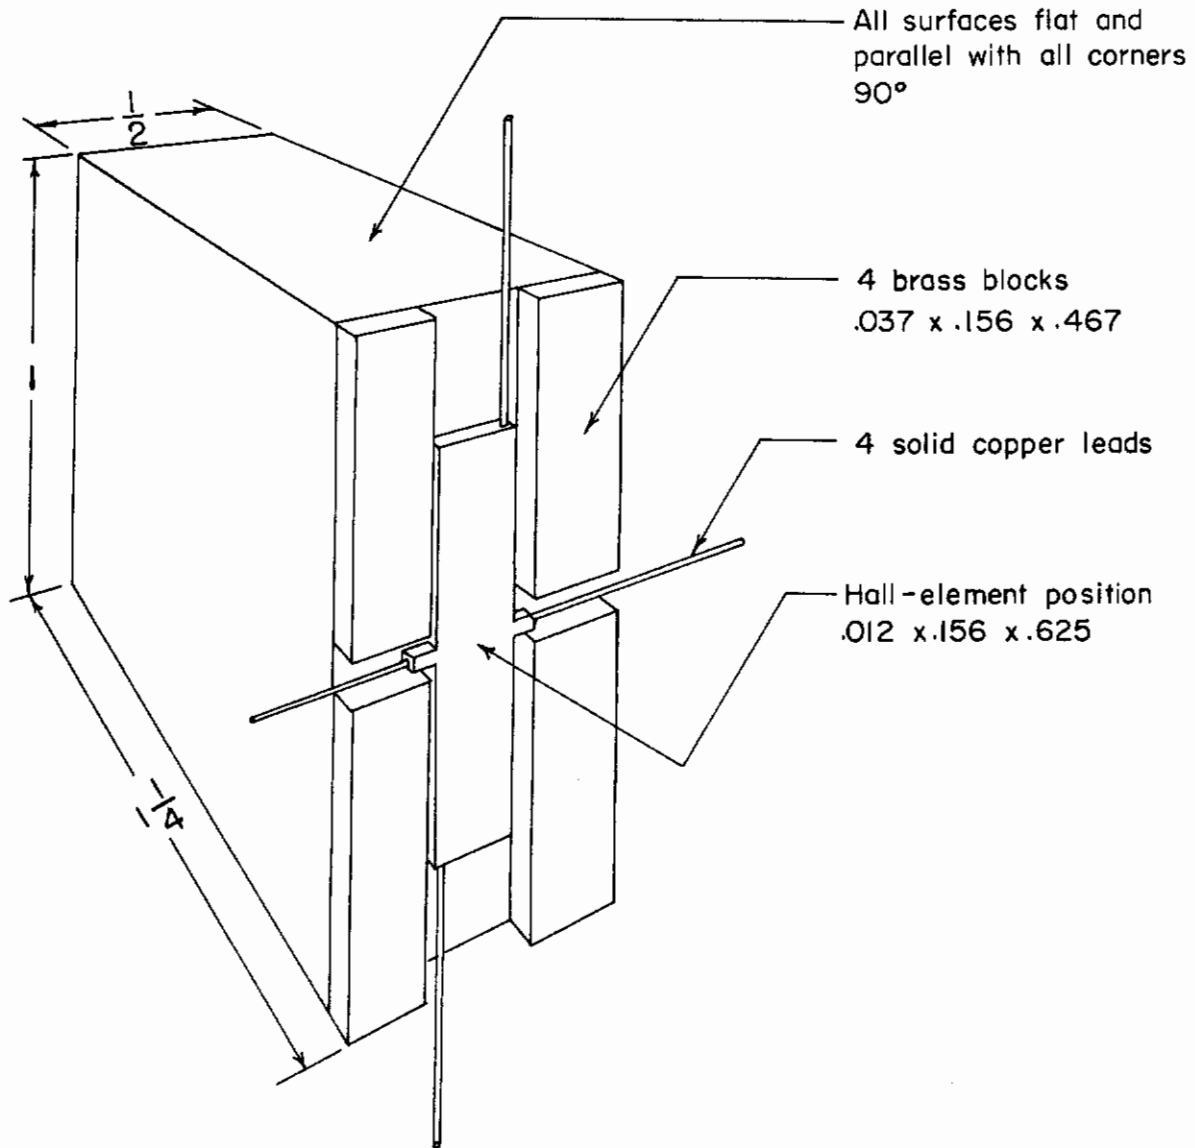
PERSPECTIVE LINE DRAWING OF THE HALL MODULE
